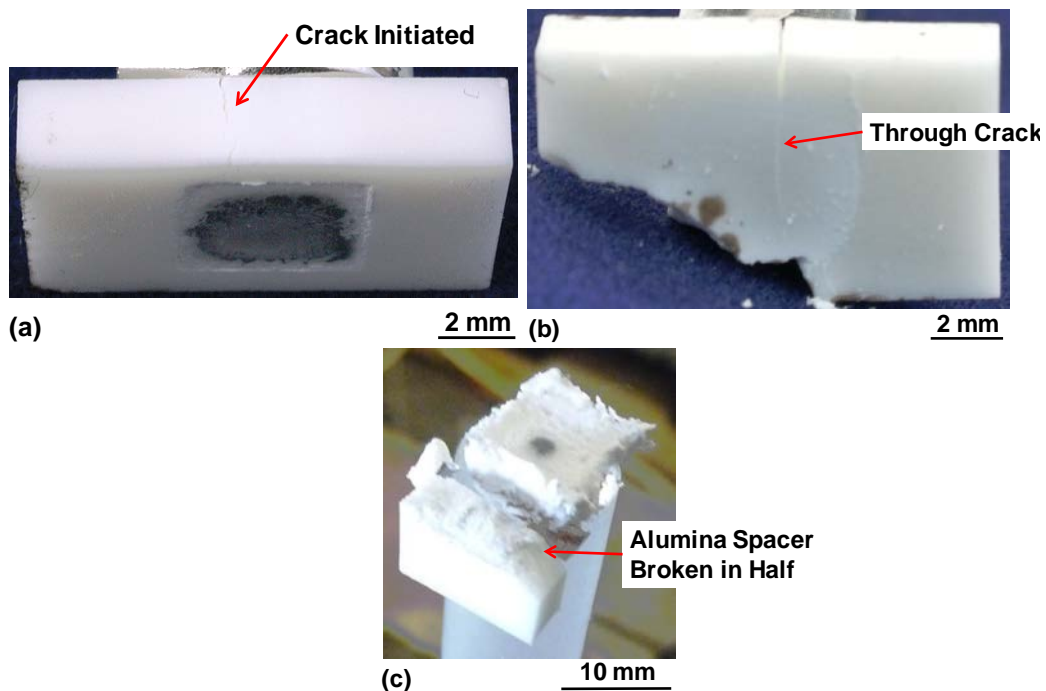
Representative photographs of alumina spacer failure sequence. (a) Crack initiation on outer edge of spacer. (b) Crack all the way through alumina spacer. (c) Alumina spacer failure.
